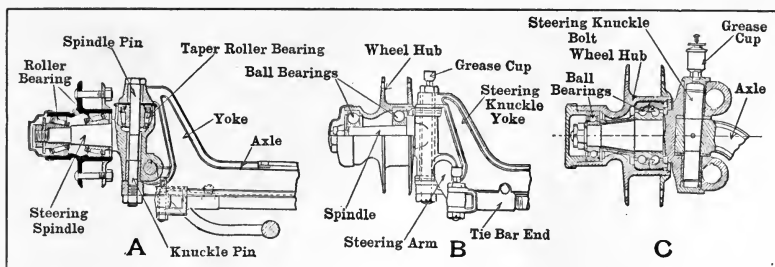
Typical Front Hub and Steering Knuckle Designs. A—Elliot Type Hub with Taper Roller Bearings. B—Front Hub Mounted on New Departure “Radax” Ball Bearings. C—Mercedes Type Steering Knuckle, Hub Mounted on Single and Double Row Bearings.
